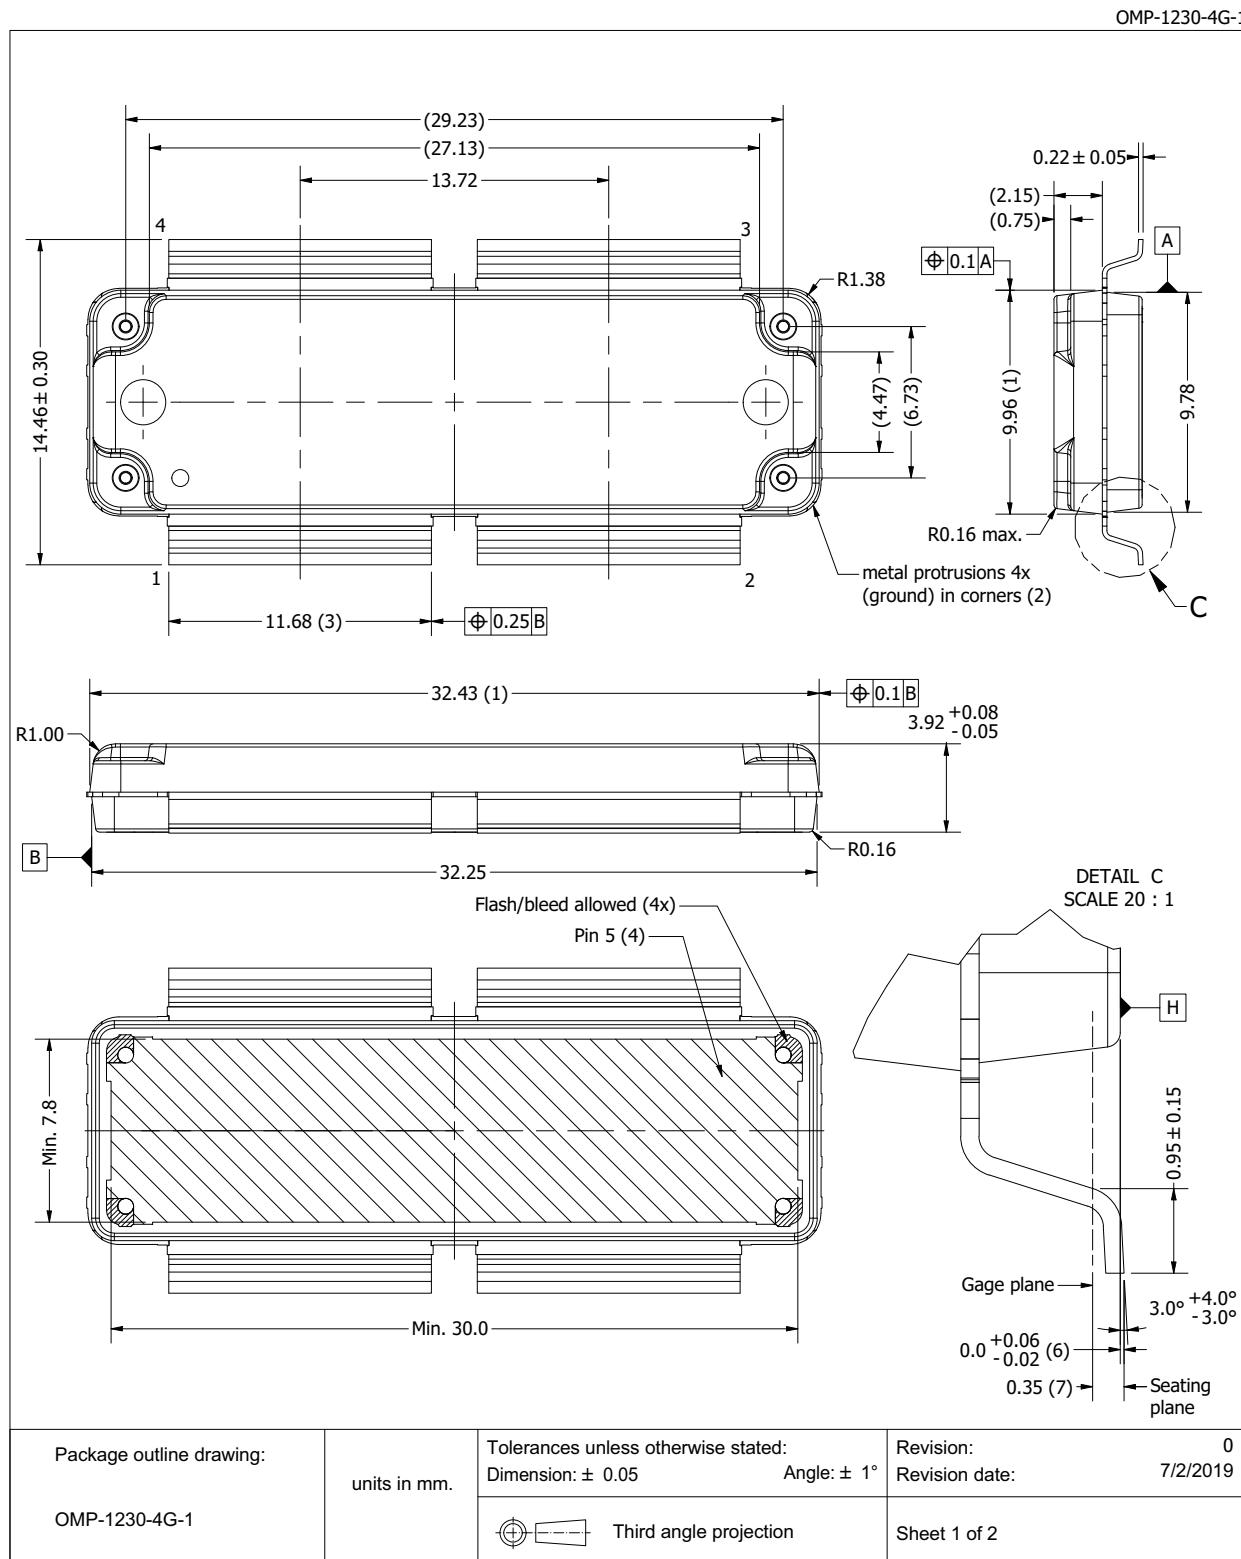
Package outline OMP-1230-4F-1 (sheet 1 of 2)
